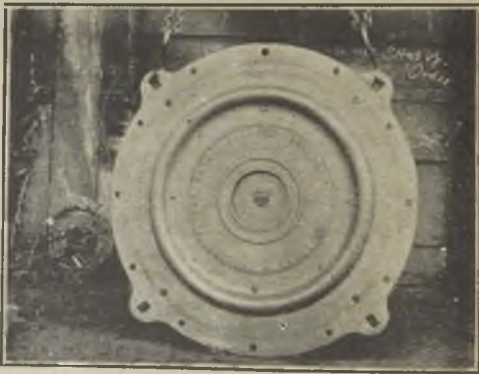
PATTERN PLATE FOR THE ENDS OF THE ROLLER.
